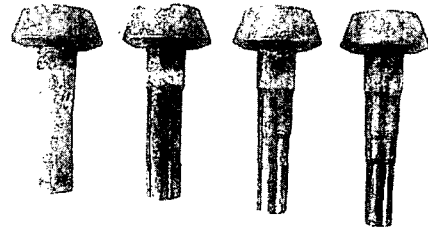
Cold forging processes of drive pinion shaft lubricated with conversion coating free lubricant [13]
